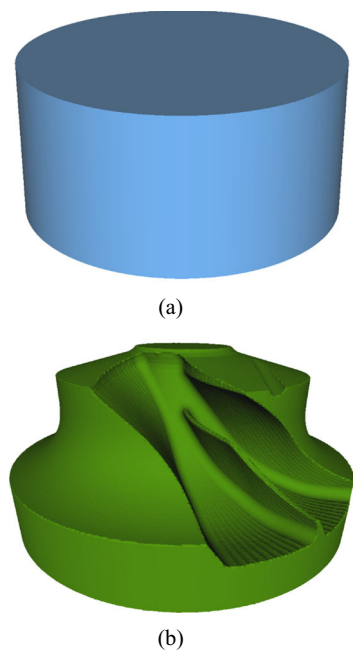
Industrial case study. a Blank workpiece. b In-process workpiece of an IBR with one blade machined
